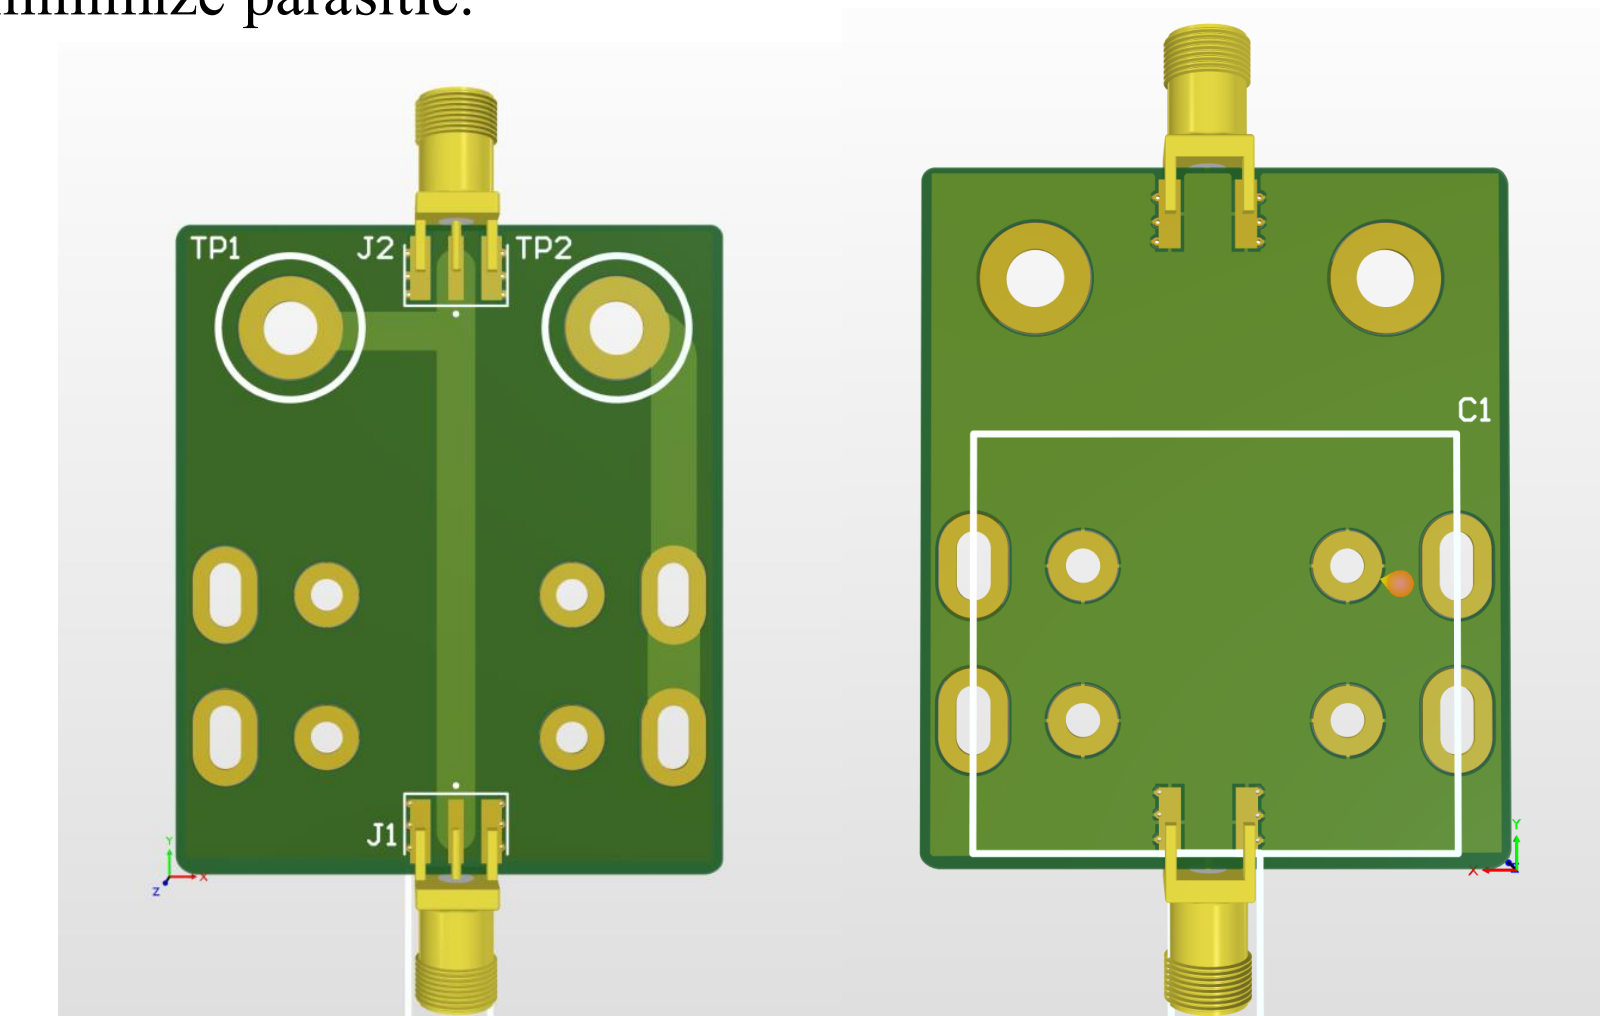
PCB Apparatus (Front – Left, Back – Right)
